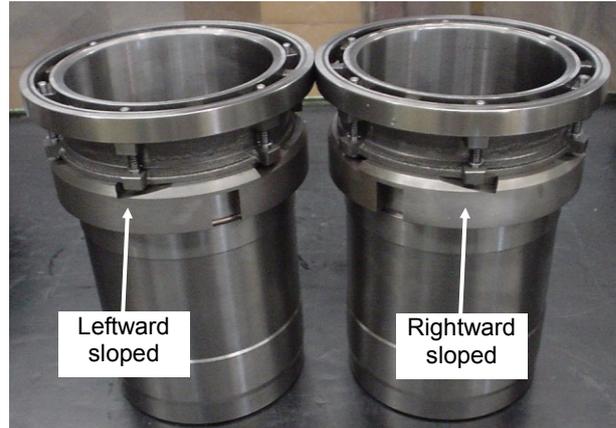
Example of Incorrect Cam Ring Mounting
